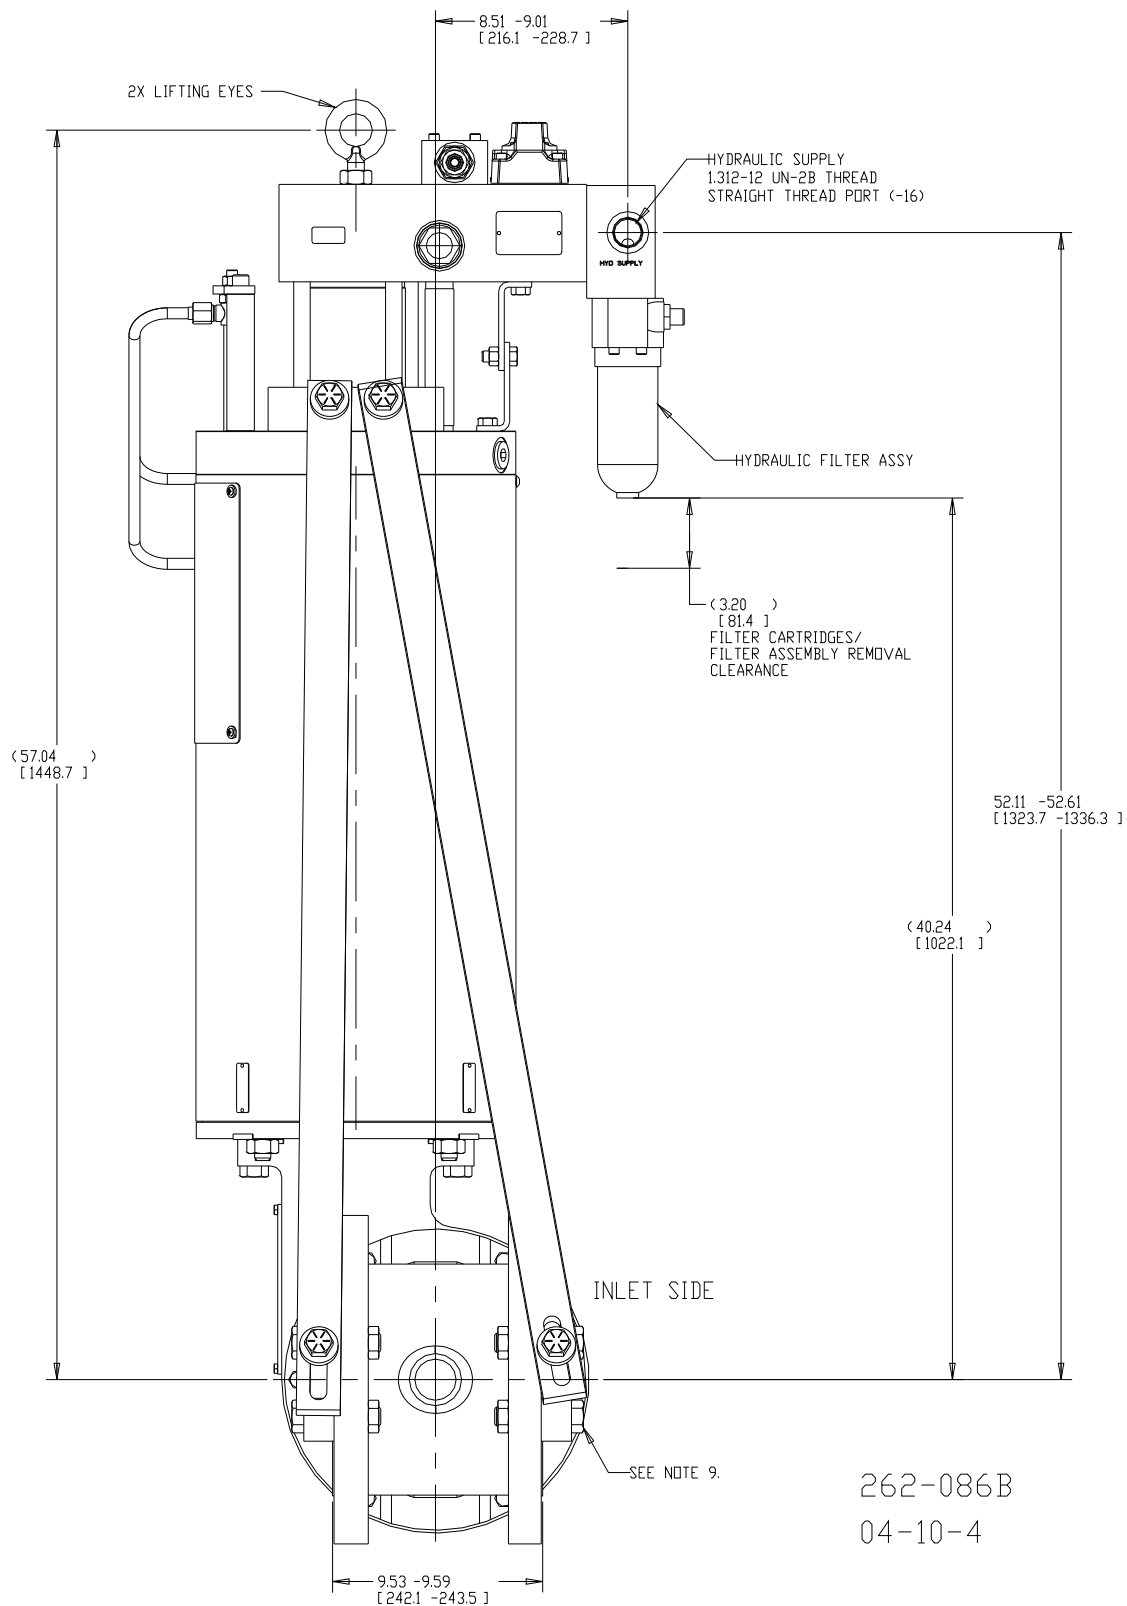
8-inch SS-260 Gas Stop/Ratio Valve Outline Drawing
